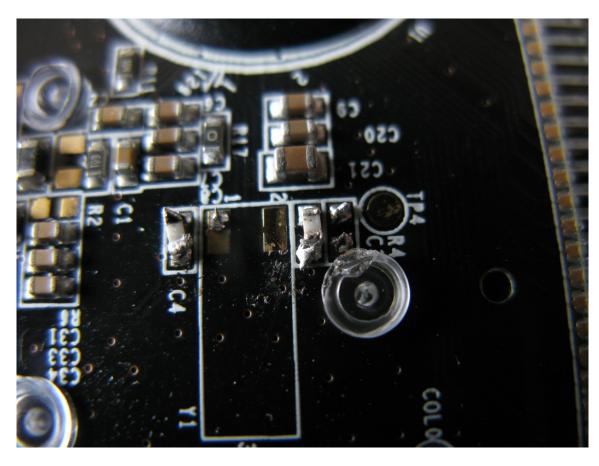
Put tiny capacitors in the vicinity of C3 and C4, hold with wooden toothpick, solder contacts, while solder is liquid, put the caps in position with toothpick. This is a layman's work. If you can do better - good for you!
